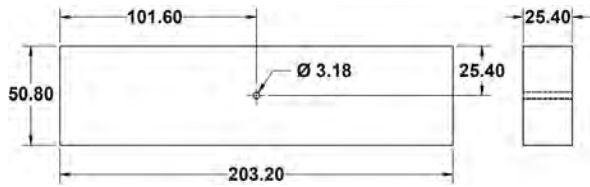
Engineering drawing of the test sample used in the contact UT approach (units in mm).
